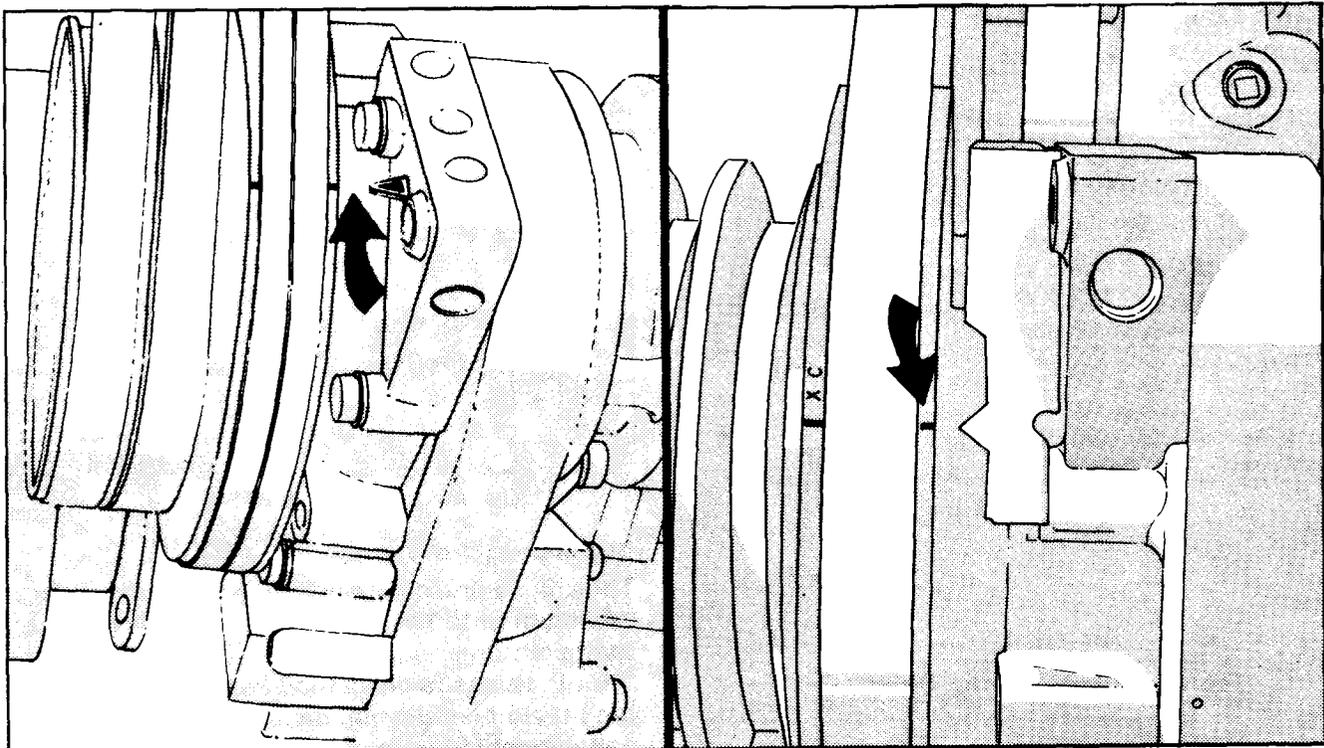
(OM1050L). Align The Timing Marks With Pointer On The Gear Cover.
